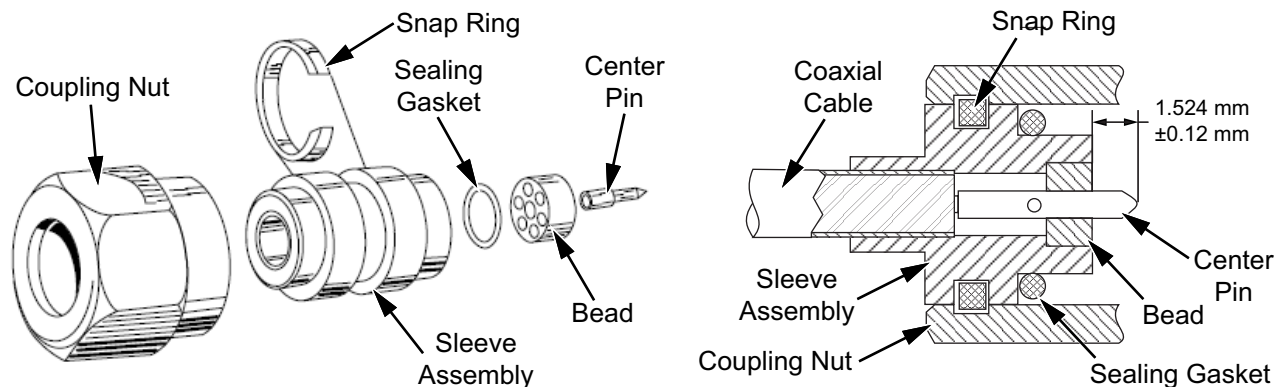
[K101M-085-R or EK101M-085-R](#) Assembly
